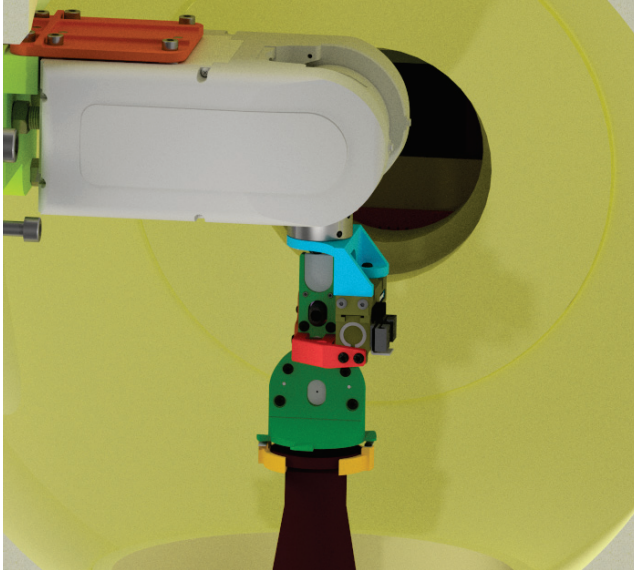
Renderings of the inner part of the scattering chamber, the manipulator is in the gripping position and the cry-cooler is disconnected and lowered.
